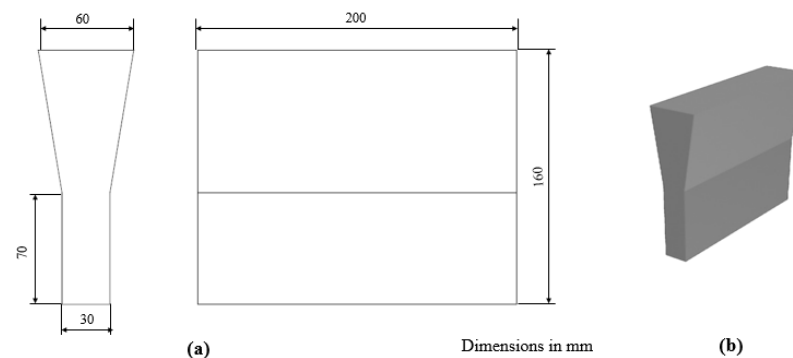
(a) Dimensions of Y block and, (b) Y-shape sand mold.
